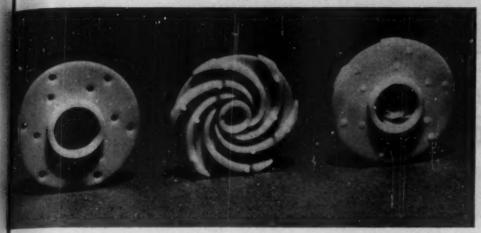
Impeller for Flint & Walling submersible pump. The two parts at left are molded of acetal resin, and joined, right, by cold heading.
